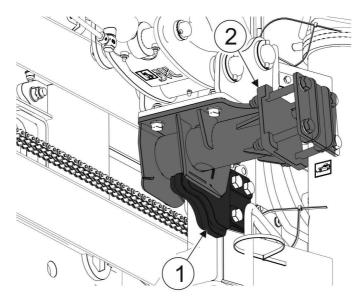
Mounting of the working head connection on the working head hitch.(1)- working head hitch; (2)- working head connection
